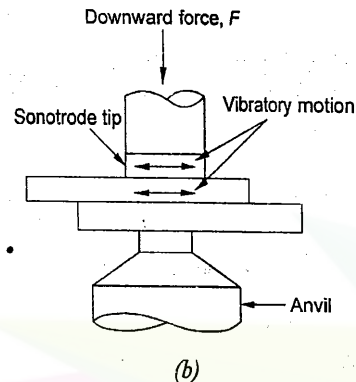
Wedge-reed ultrasonic welding system
